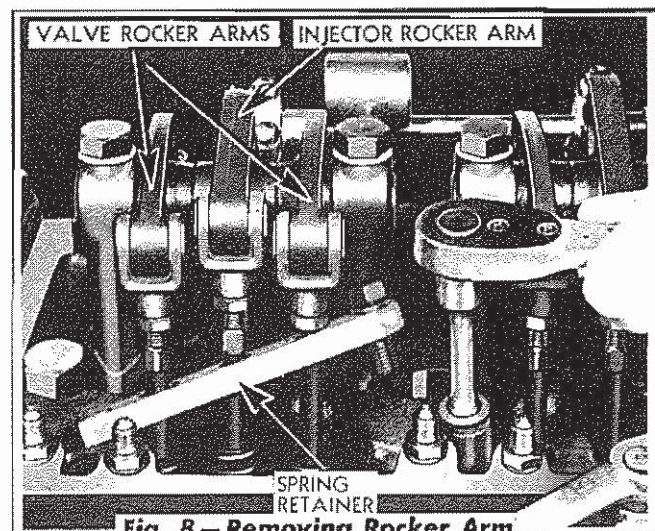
Removing Rocker Arm Push Rod Retainers
